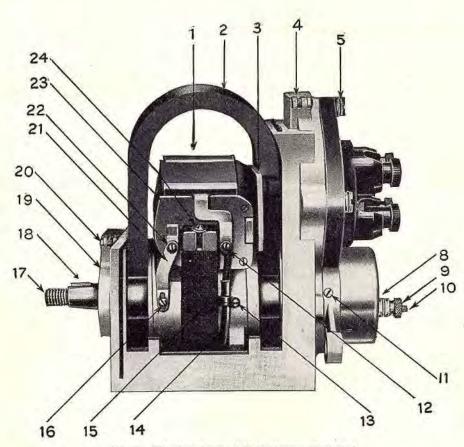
Side view of parts of Dixie Magneto (4-cylinder).
